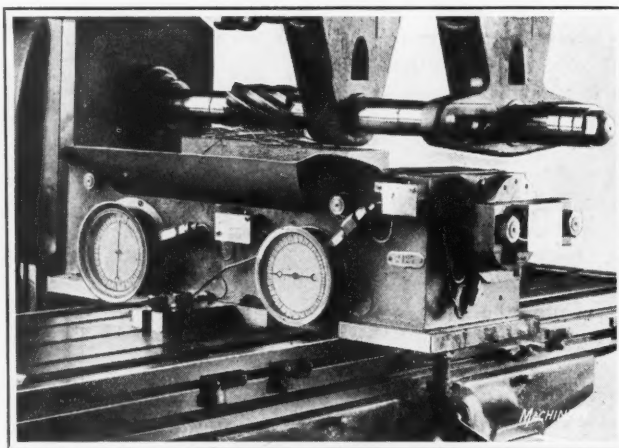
Poliakoff Dynamometer being used to determine the End Thrust of a Cutter
